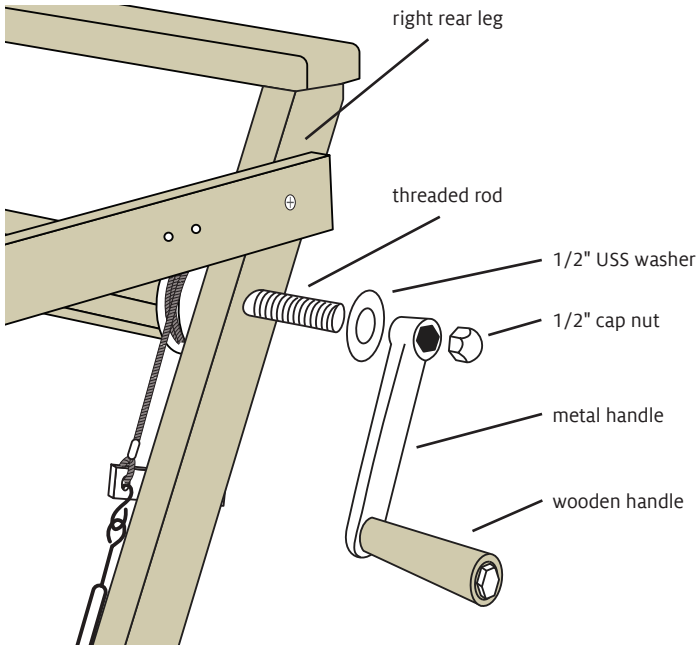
INSTALLING WARP BEAM CRANK HANDLE
